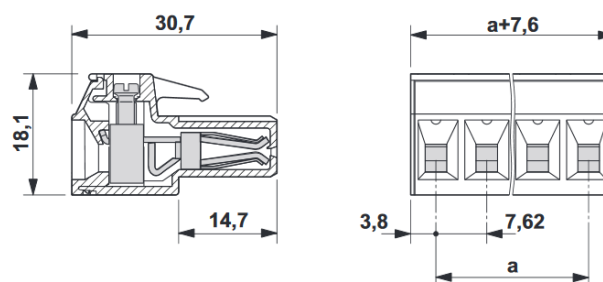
Dimension drawing TC.ACSUSense plug X615 (unit of measurement: mm)
